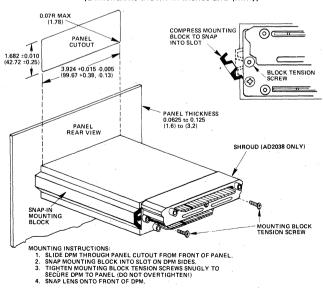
AD2037/38 Mounting Instructions (Dimensions shown in inches and (mm))
